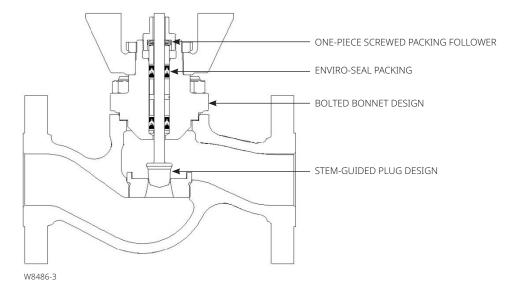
Fisher GX Bolted Bonnet Control Valve Assembly with Stem-Guided Contoured Plug (Size DN 25 and NPS 1)
